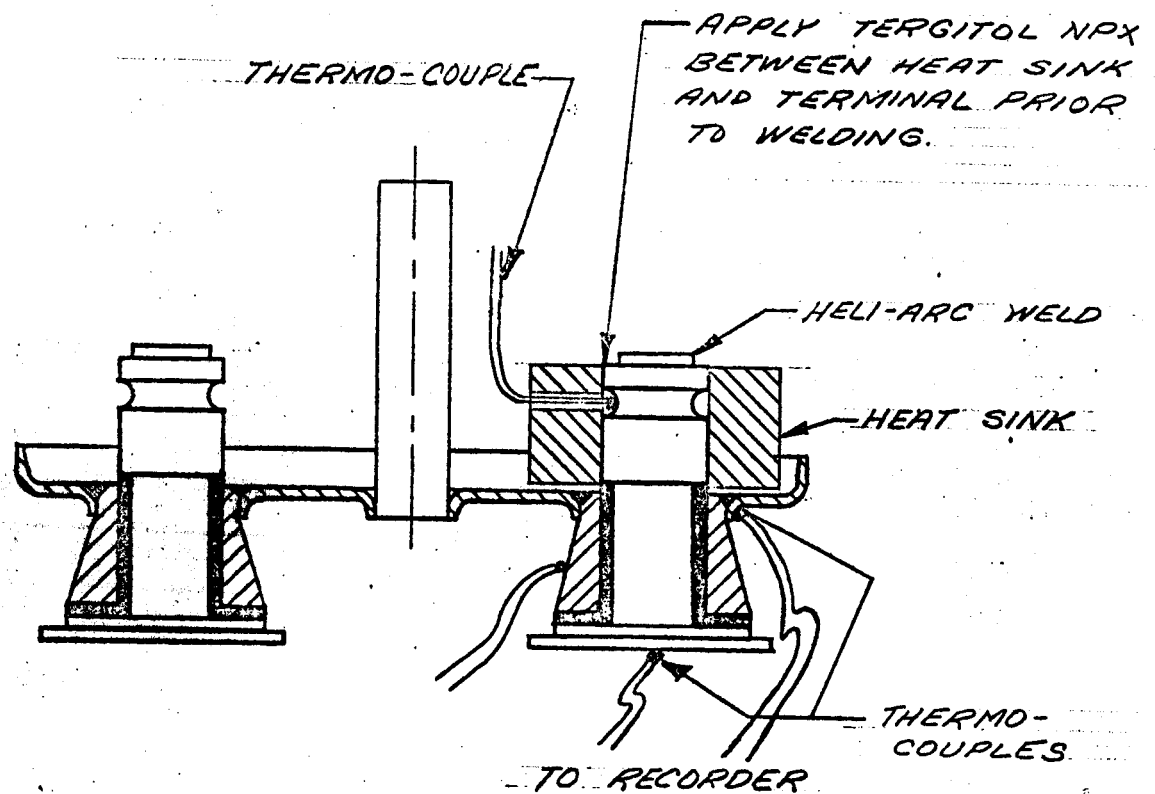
A HEADER WELDING INVESTIGATION
